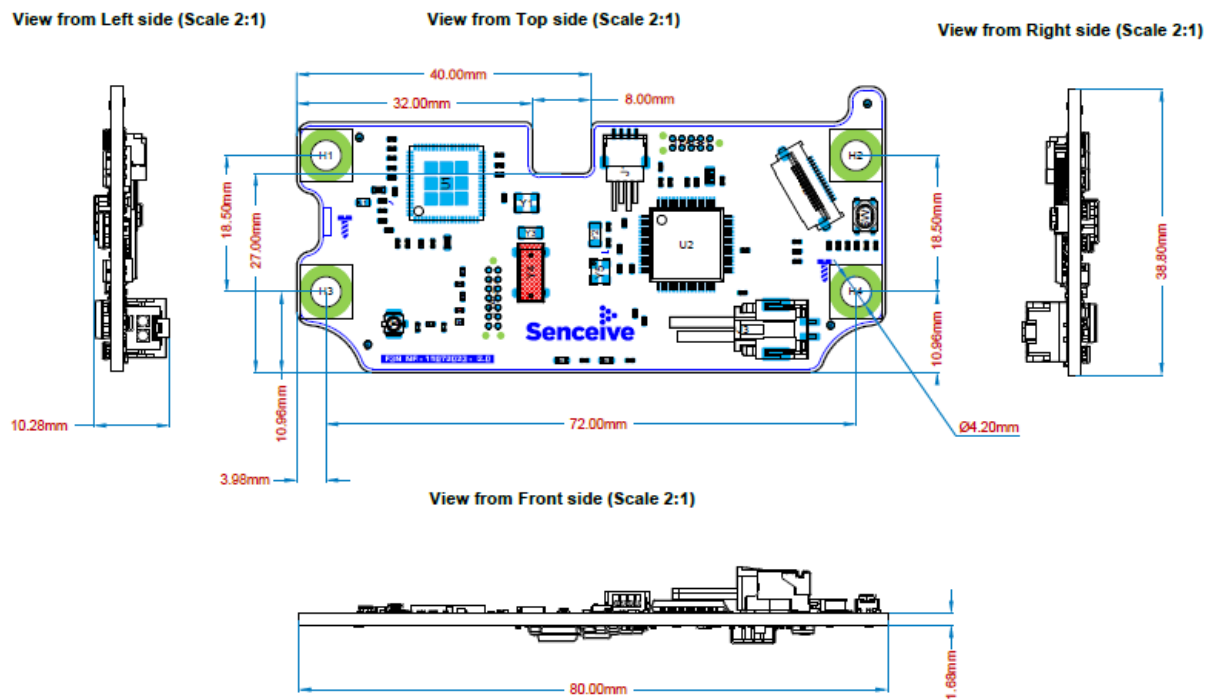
FlatMesh F3N\_NF Radio PCB Dimensions Drawings
